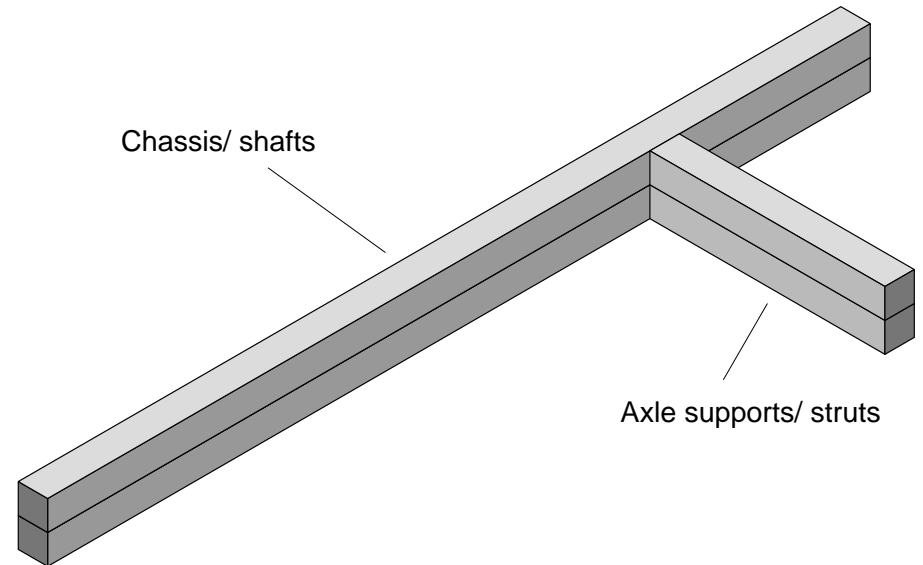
welding animal shaft and axle support strut assemblies.
